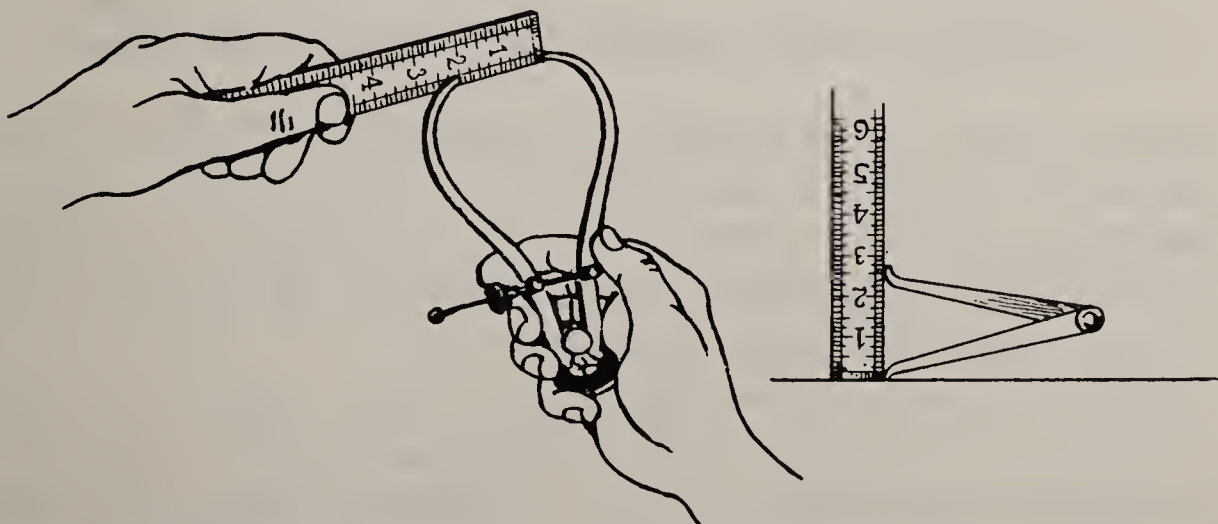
Method of setting calipers. To set calipers hold one leg on end of rule and the other on measuring line.
